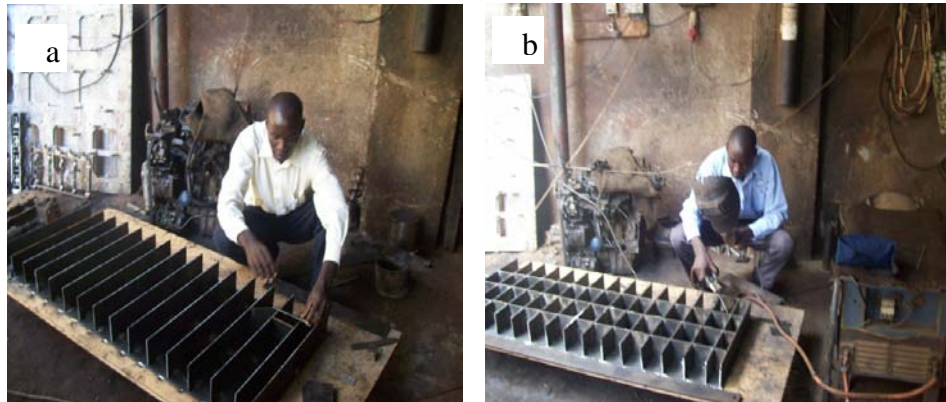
Stacked and interlocked honeycombs sheets being welded onto the base plate: arrangement of (a) stacked sheets; and (b) interlocked sheets on the table.
